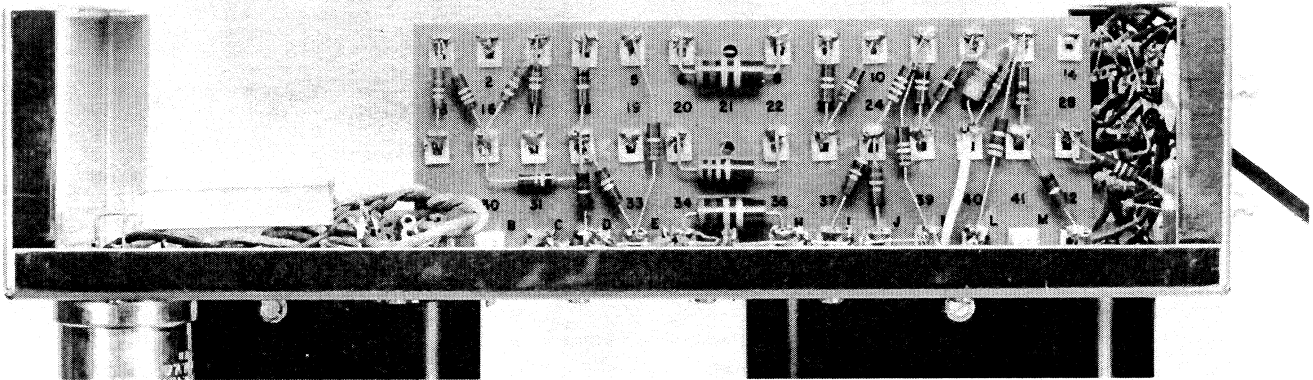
SIDE VIEW OF THE CHASSIS, WITH THE PARTS BOARD IN PLACE, AND ALL THE WIRING COMPLETED
